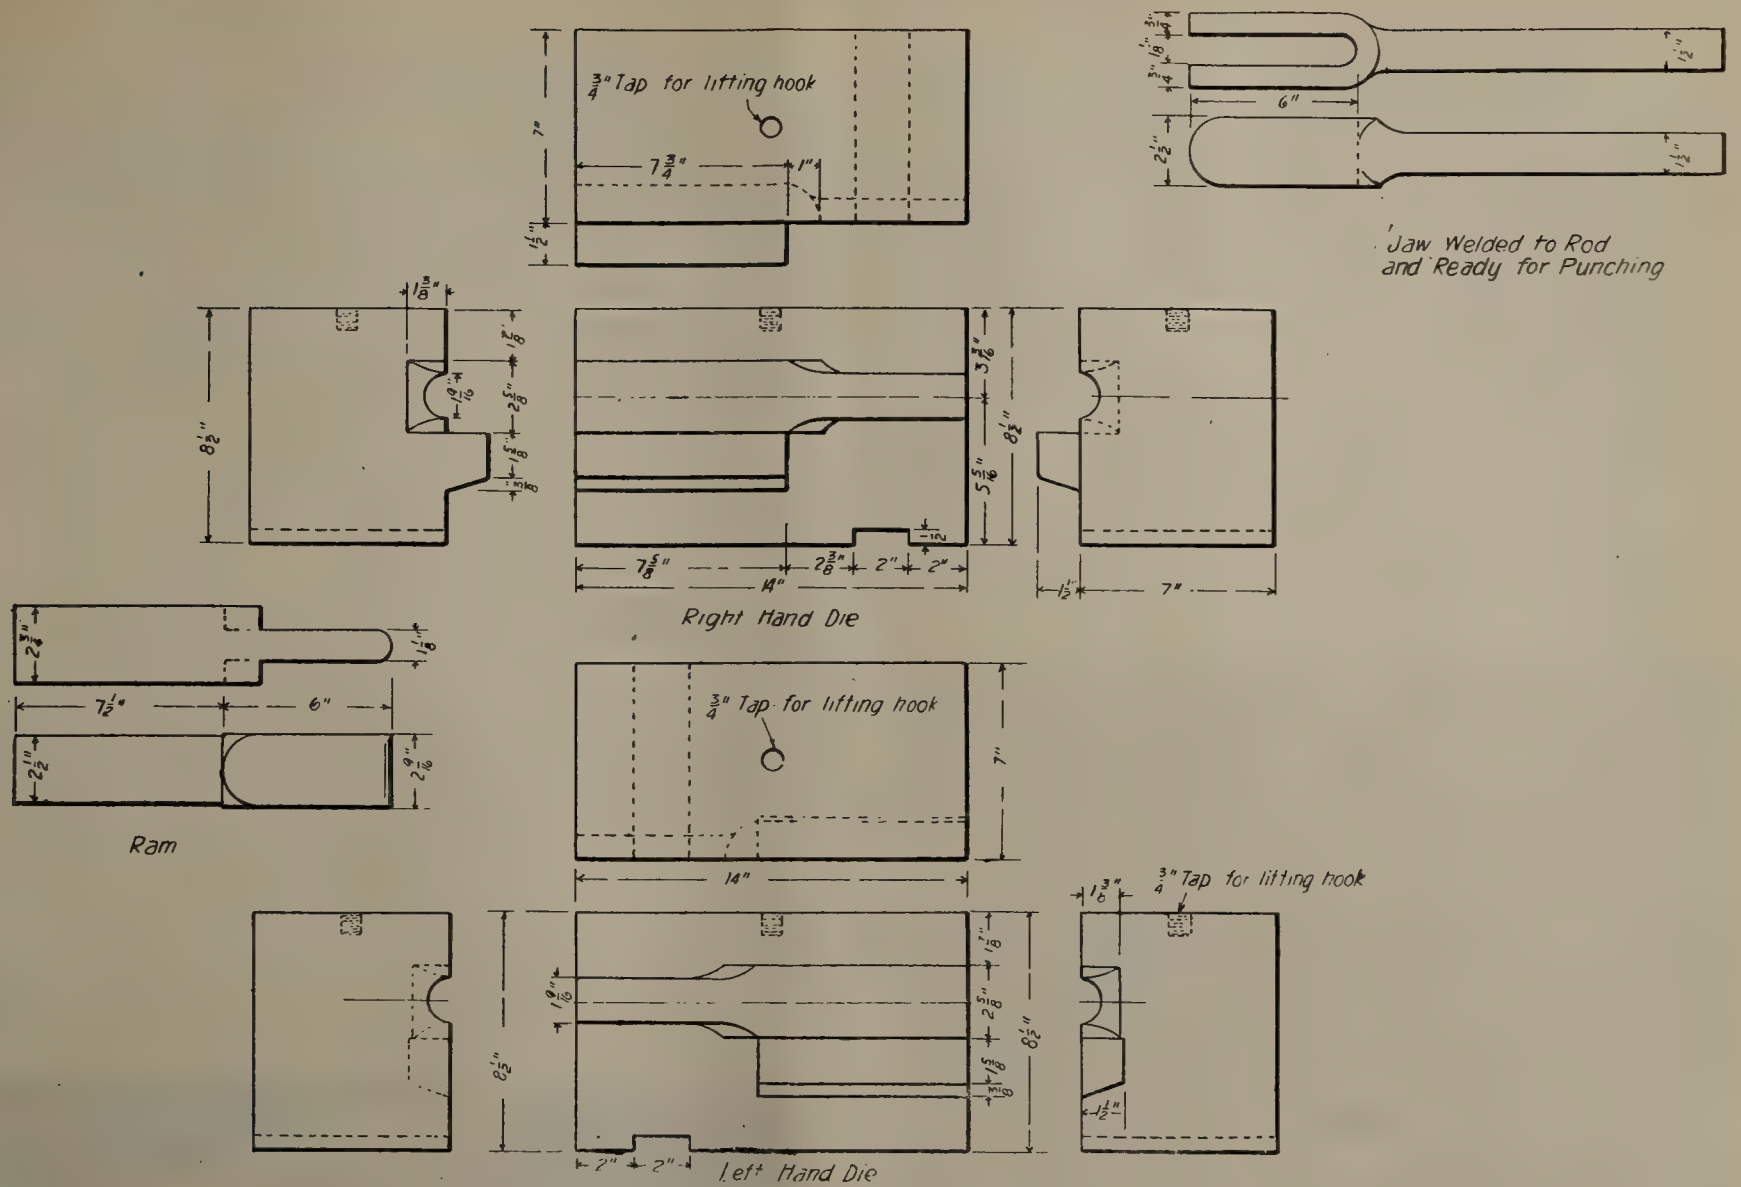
Dies for Welding Jaws on Push Rods.
